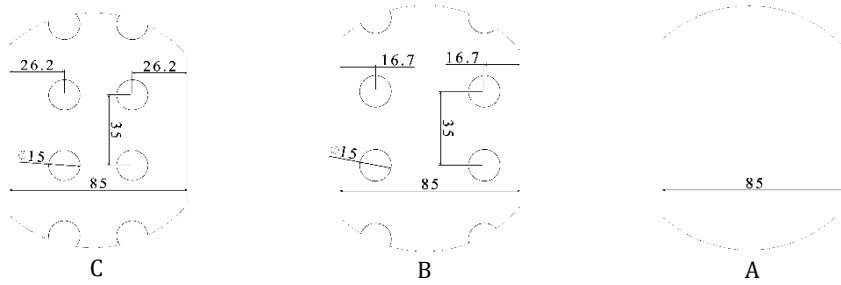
Samples of cold roll forming tests a) without holes b) near the bend c) on the bend.
